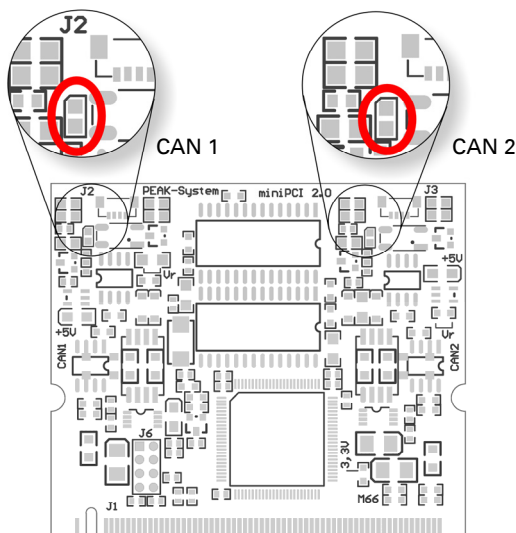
Positions of the solder fields on the PCAN-miniPCI card
